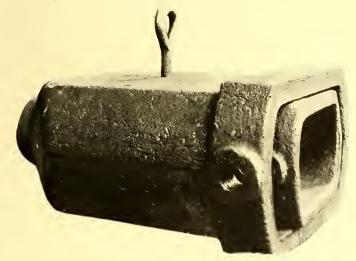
SHAFT STRAIGHTENER ASSEMBLED
